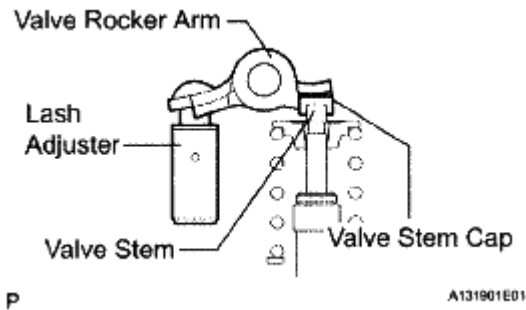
Applying Engine Oil To Lash Adjuster Tips And Valve Stem Cap Ends
